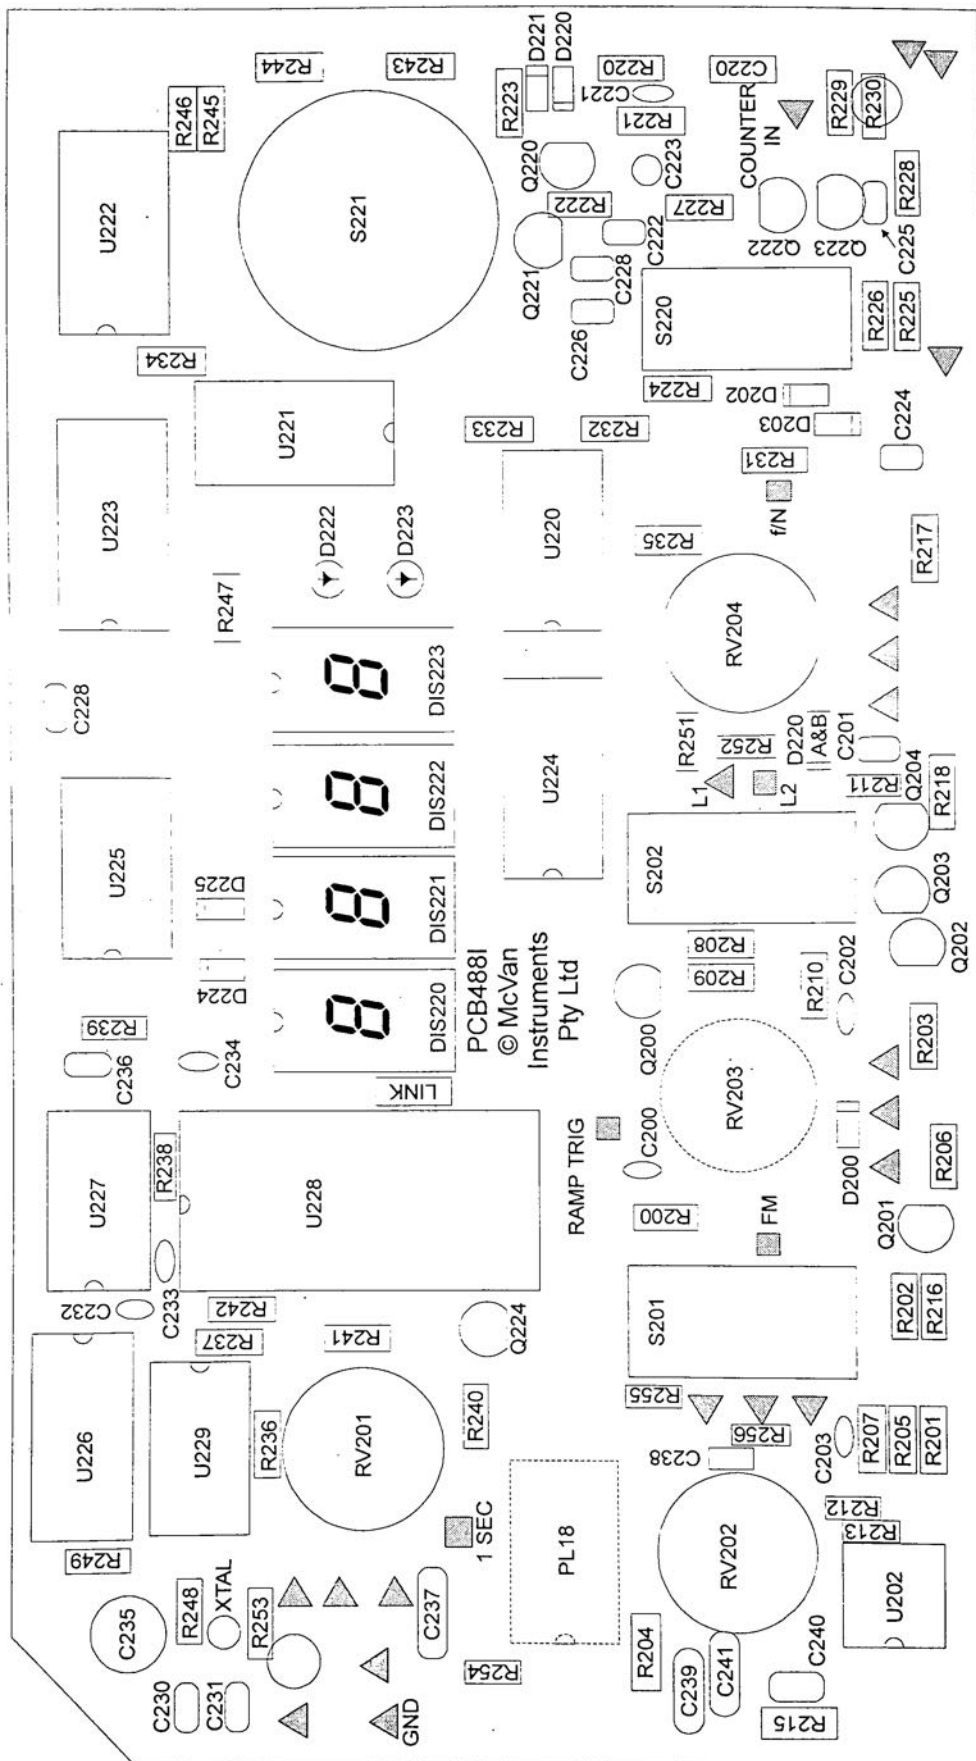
PCB488 Counter PCB Layout and Component Designations.
